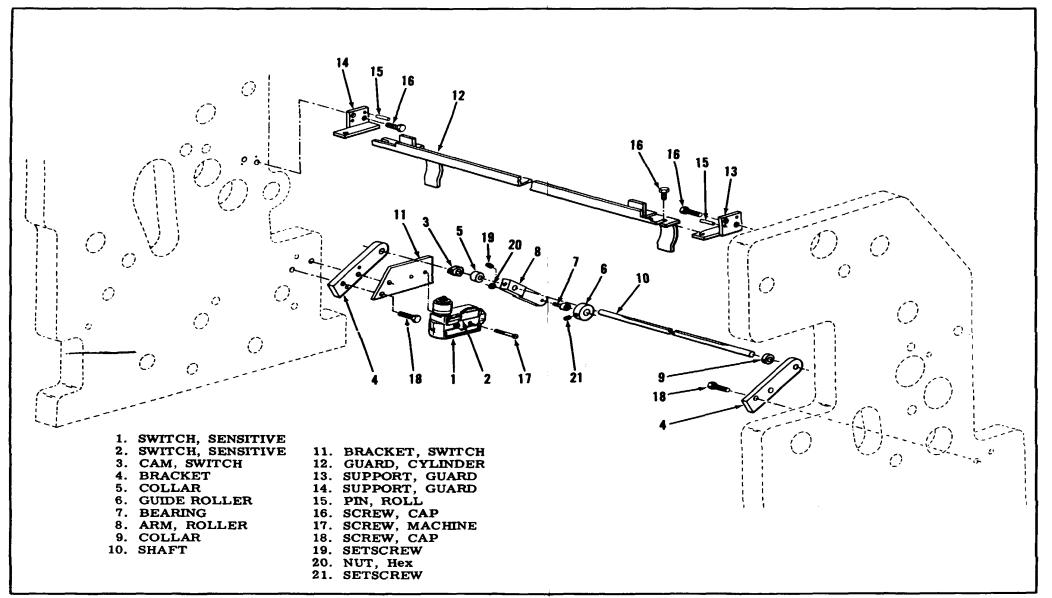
Paper Break Mechanism and Cylinder Guard, Exploded View
